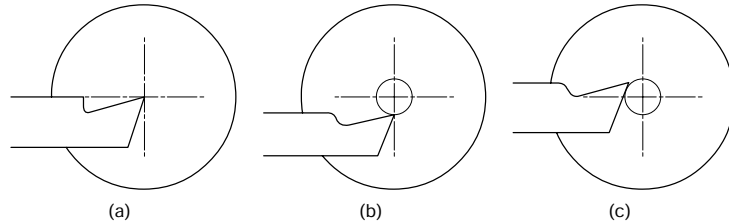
Effect of tool height when facing: (a) tool setting correct – surface will be flat; (b) tool setting low – surface will not be flat; (c) tool setting high – surface will not clean up, and tool will be prevented from reaching centre of bar
